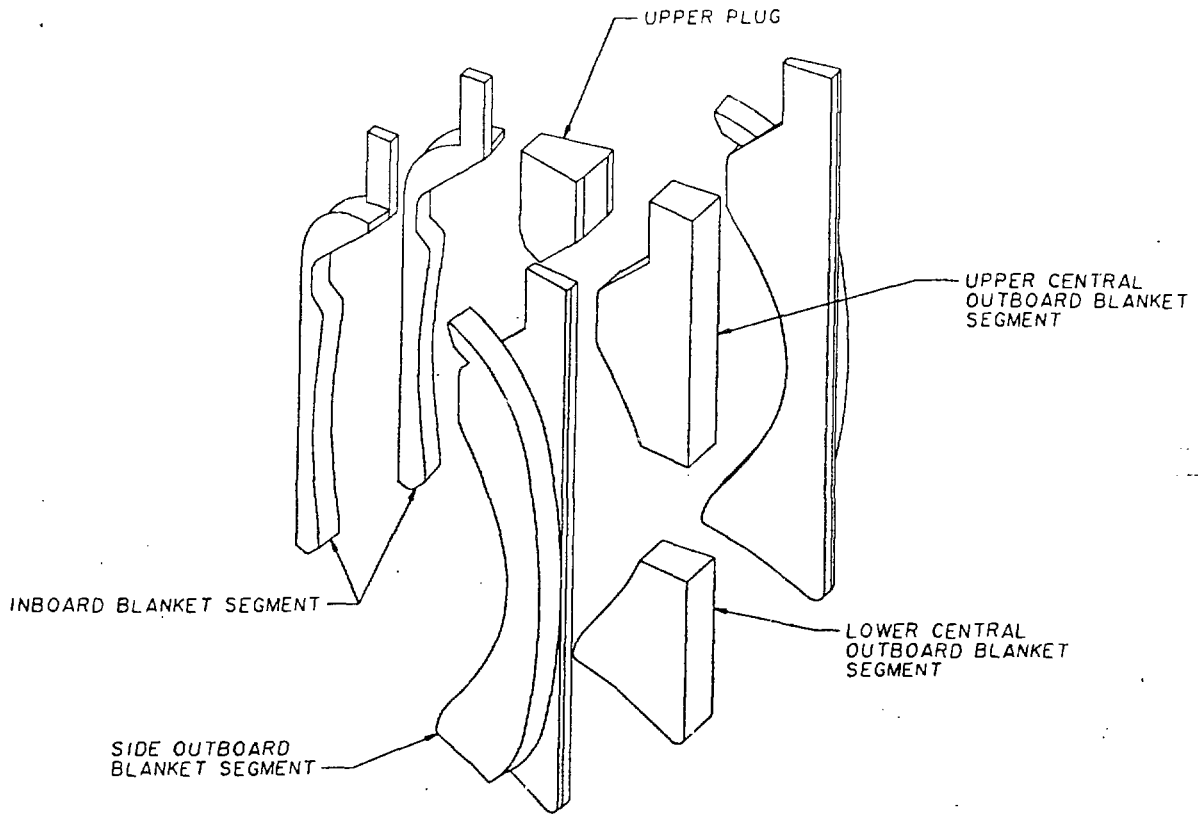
Isometric view showing the inboard and outboard blanket regions.
